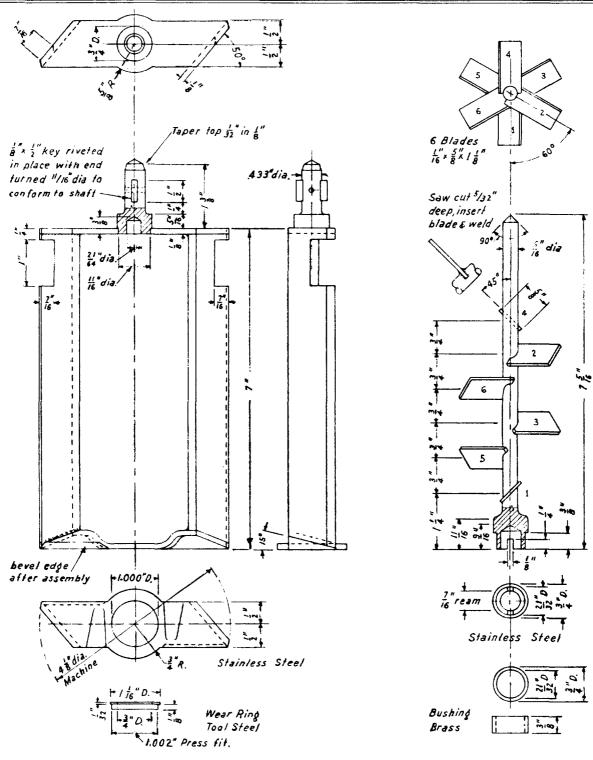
ASSEMBLY STANDARD OIL COMPANY OF CALIFORNIA THICKENING-TIME TESTER
